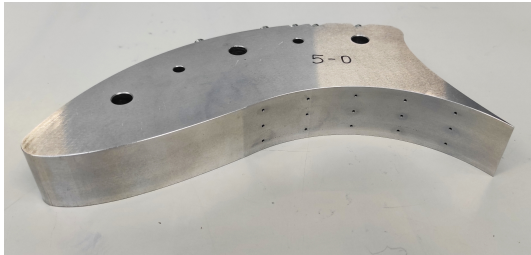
Nozzle segment front view with 1 mm pressure taps.
